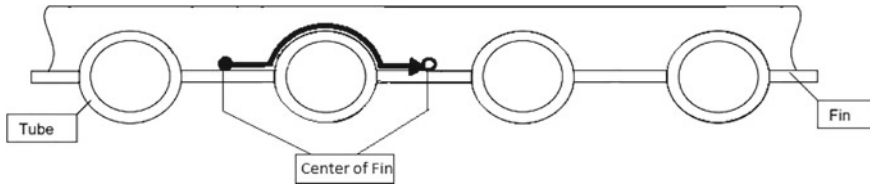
Scallop bars welding procedure. Full weld that does not start/stop on tube
